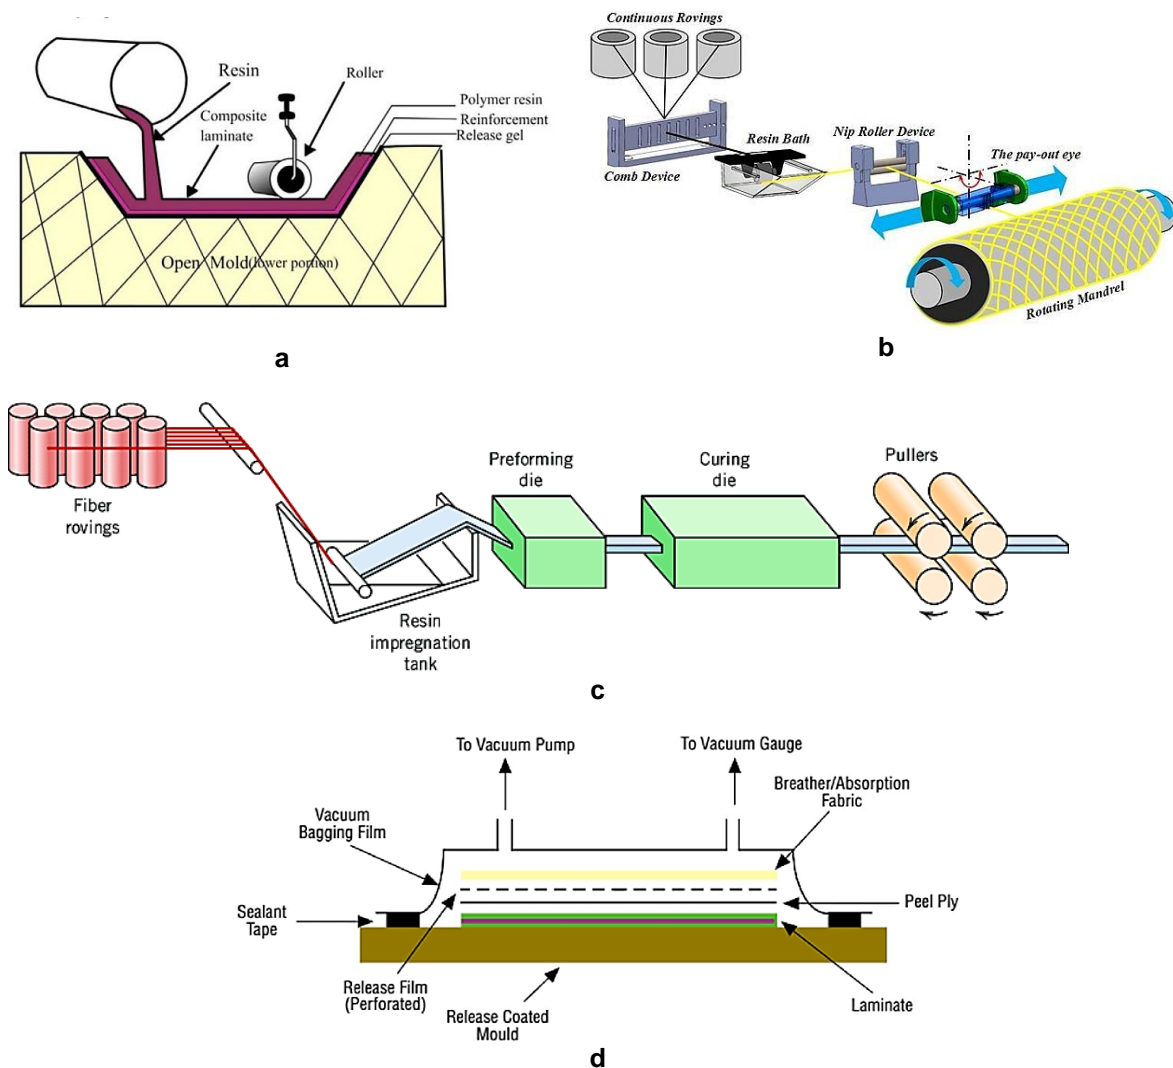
Manufacturing process techniques a) Hand lay-up Process b) Filament winding Process, c) Pultrusion Process d) Vacuum-assisted Process
